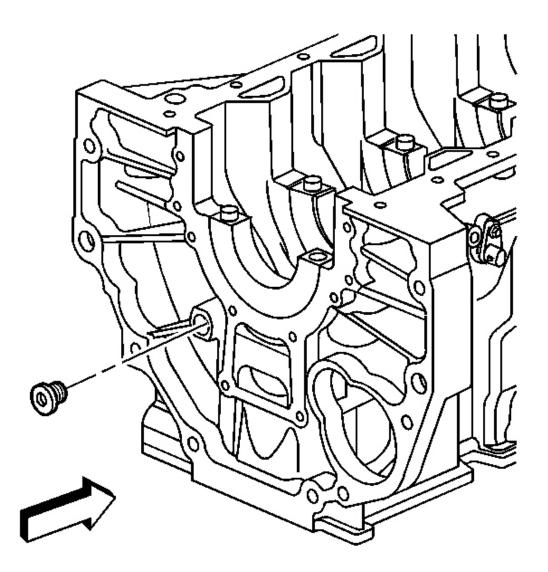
View Of Oil Gallery Plug From Rear Of Block Courtesy of GENERAL MOTORS CORP.
